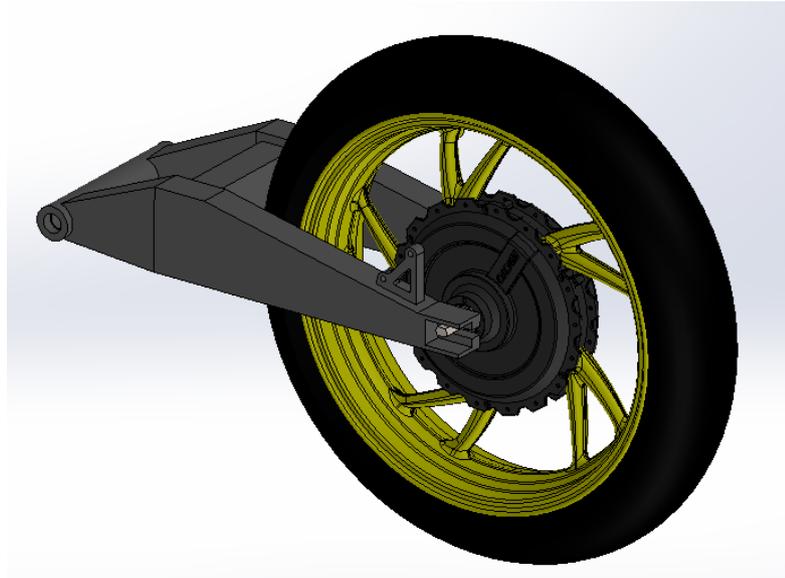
Swing arm with the rear wheel (and the HUB motor)
